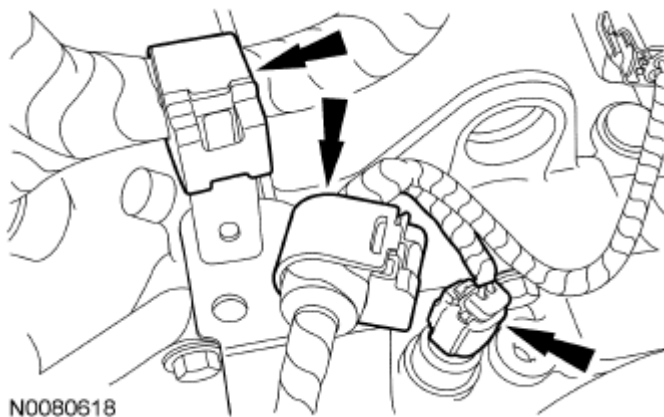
Locating Wiring Harness Retainers And Reversing Lamp Indicator Switch Electrical Connector
